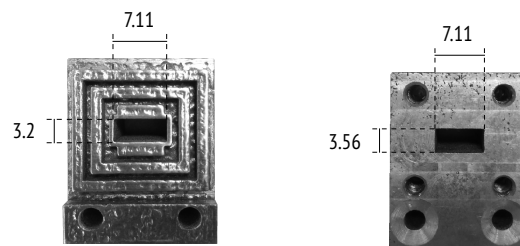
Front and back view of 3D printed non-contacting choke flange.
